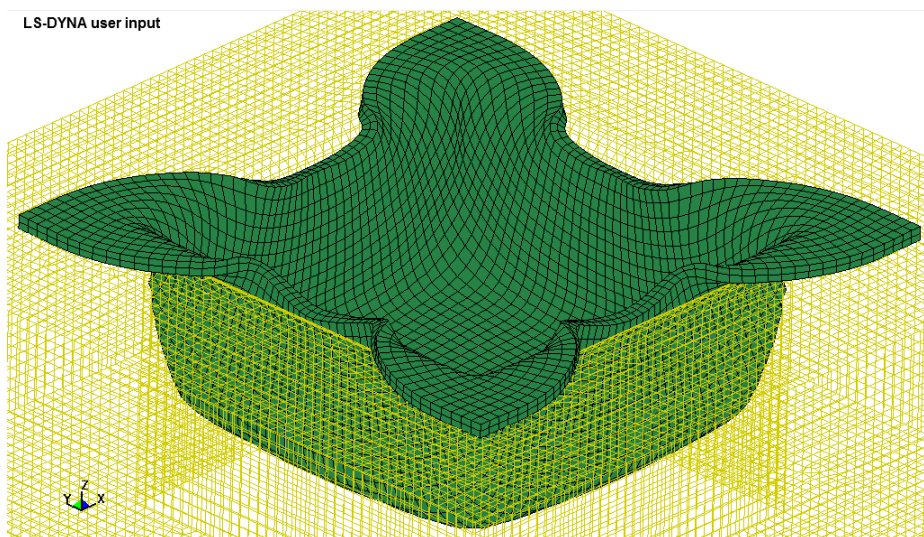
Three-dimensional model of the box-shaped part after drawing.
